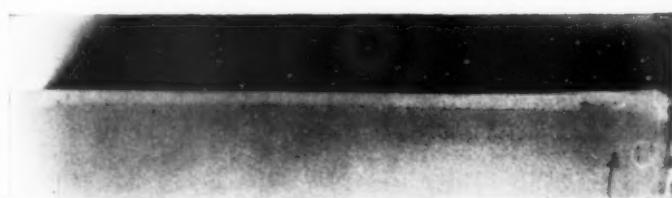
Macrograph of gas-cut edge in a 4-in. low-carbon steel billet, showing heat-affected zone. (Slightly reduced.)
